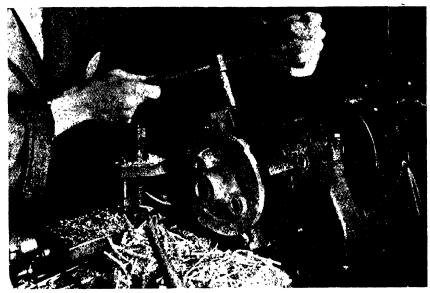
MACHINING OIL-FILTER COVER ON LATHE Tightening up chuck jaws on work. Tool set up for facing the cover.
